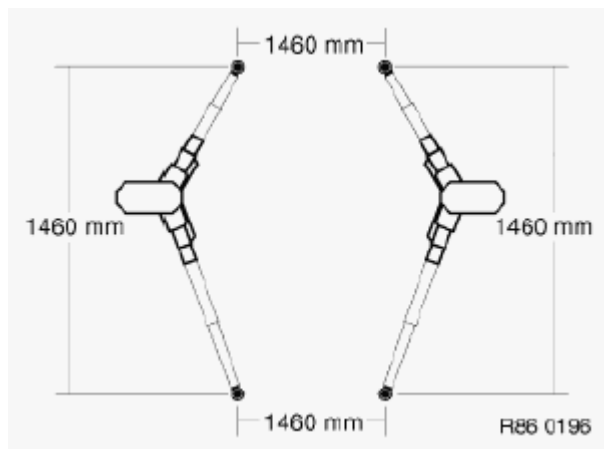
Identifying Lifting Platform Adjustable Dimensions
